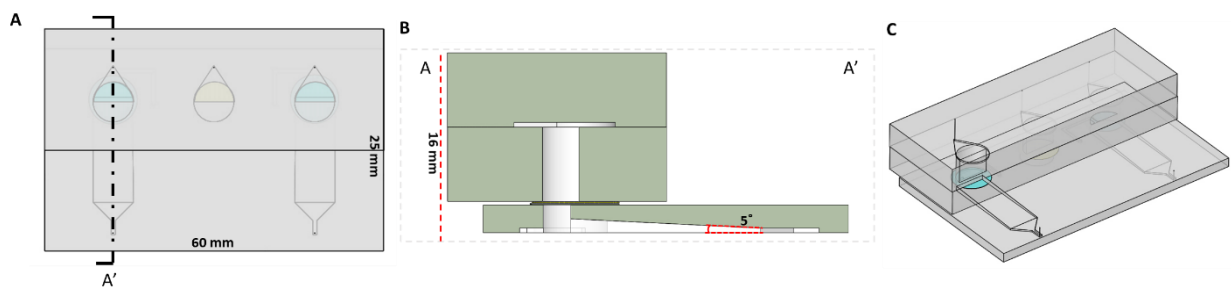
SEER platform design. A. Detailed dimension of SEER device. B. Assembled SEER platform and fabricated device.
